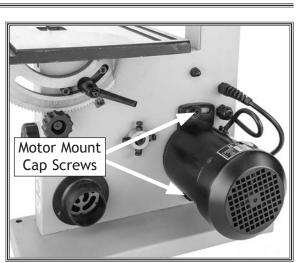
Location of motor mount cap screws used for adjusting belt tension.
